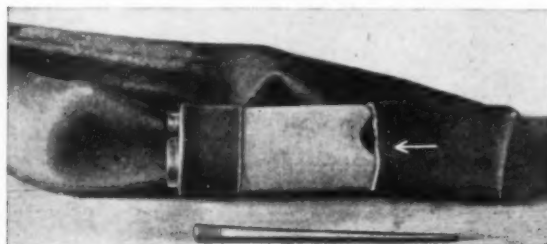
OTHER END READY TO BE PULLED ON EXPANDER
